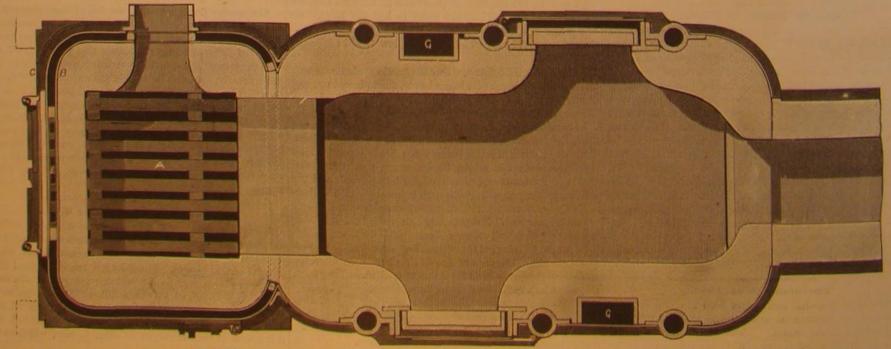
CADDICK AND MAYBERRY PUDDLING FURNACE.-SECTIONAL PLAN.
